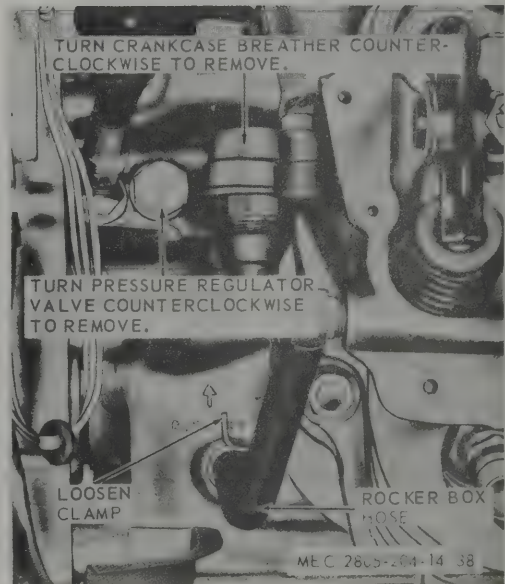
Rocker box hoses, pressure regulator valve, and crankcase breather, removal and installation.
